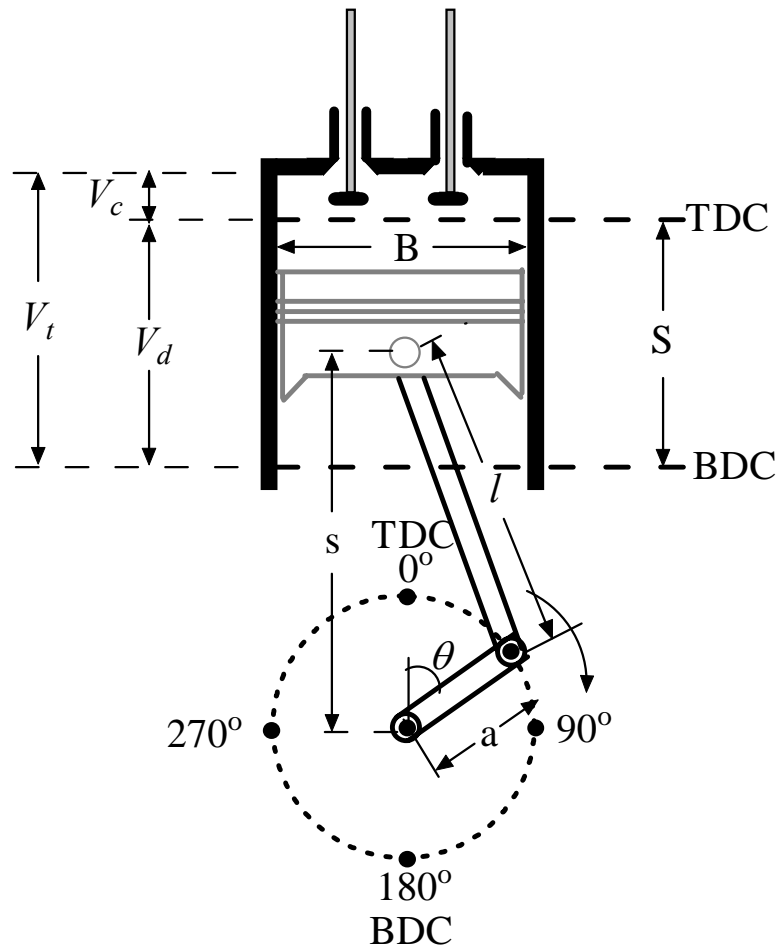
Basic Geometry of the Reciprocating Internal Combustion Engine
